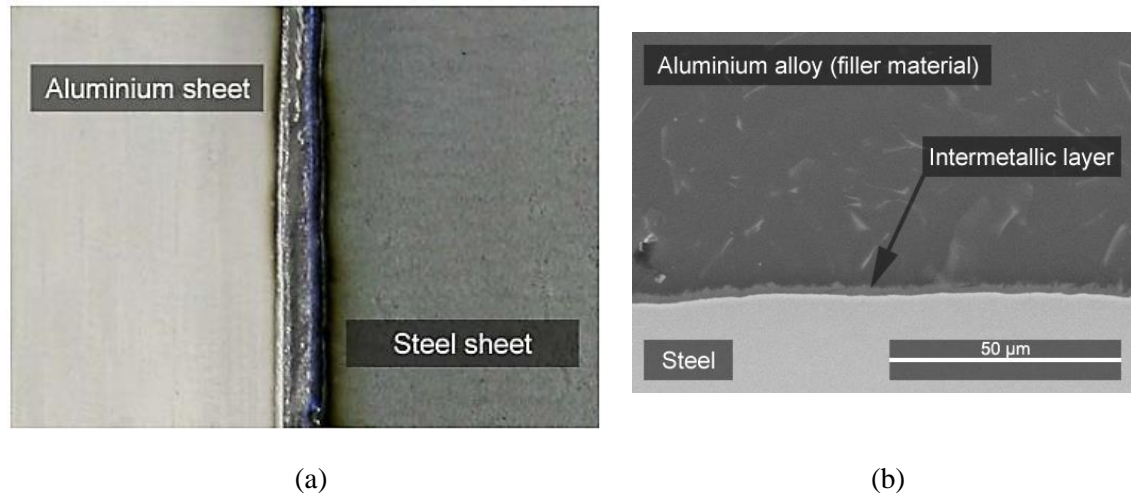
(a) The weld bead of an aluminium and steel joint. (b) An inspection shows the formation of a thin intermetallic layer. This bi-material interface shows an irregular surface close to the aluminium and a smooth surface near the steel [29].
